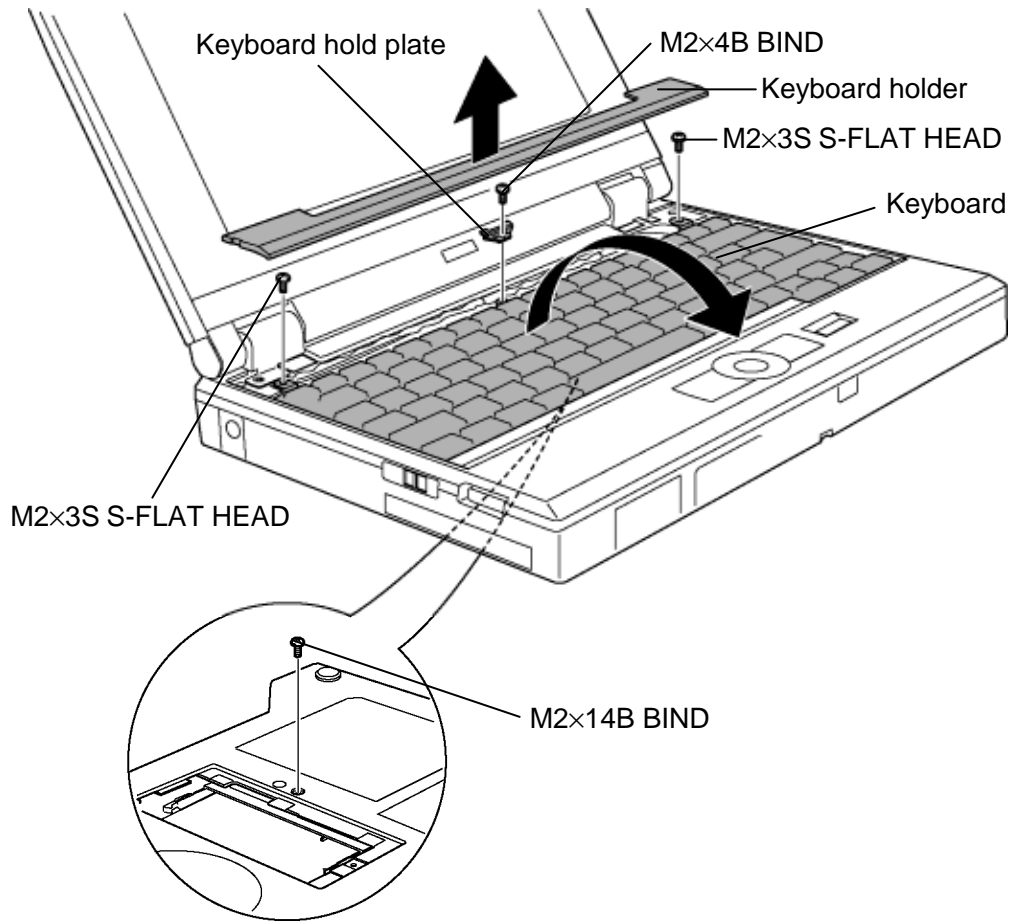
Removing the keyboard holder/keyboard hold plate
